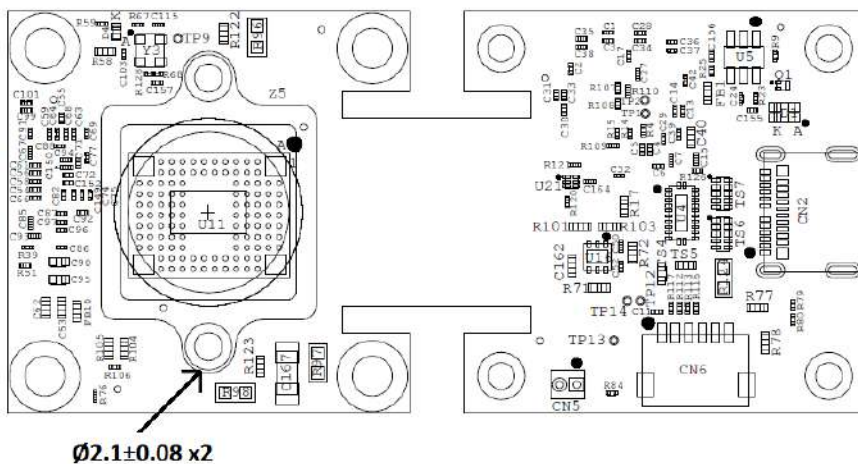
Bottom View of See3CAM_CU27 Mechanical Dimensions
